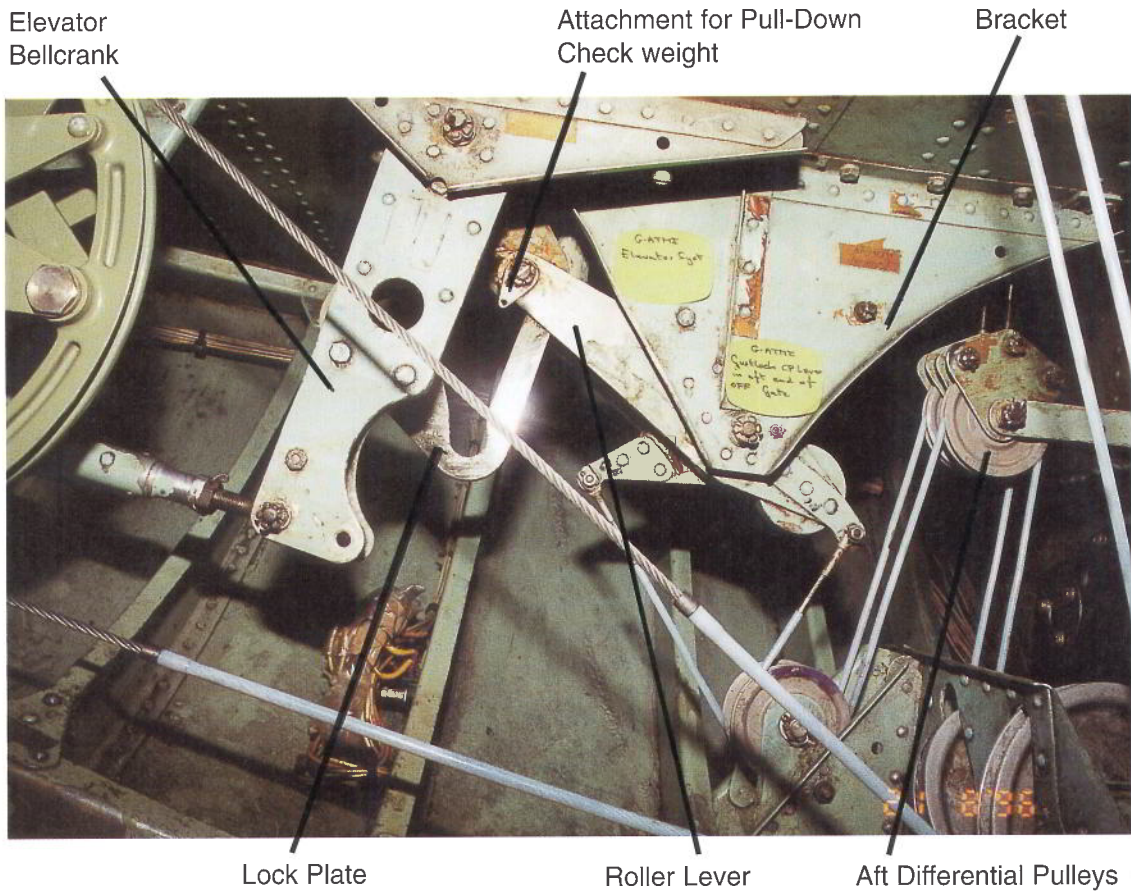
ELEVATOR GUST LOCK SYSTEM IN TAILCONE
